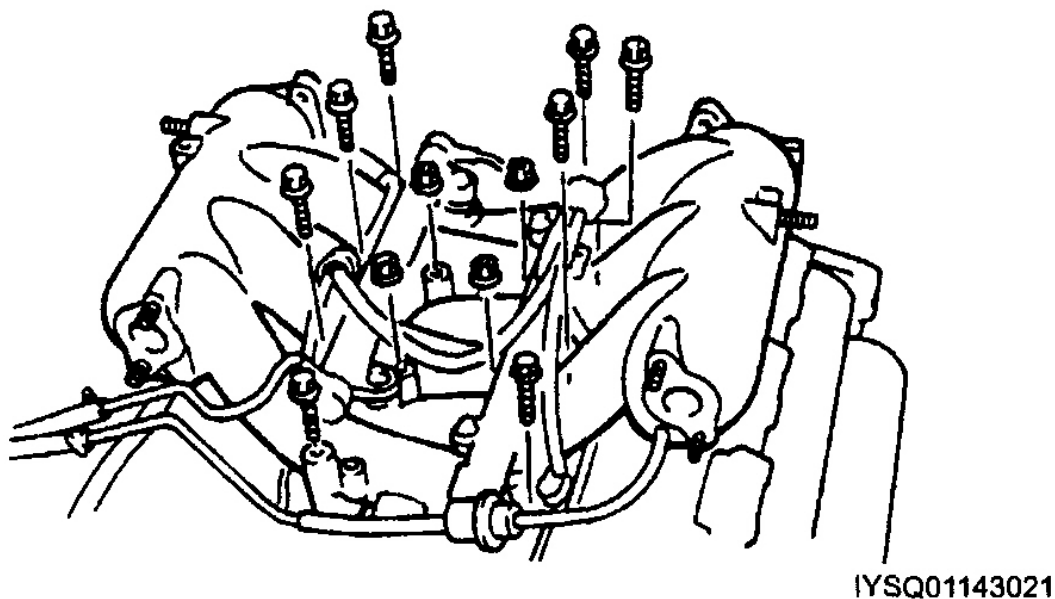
Installing Intake Manifold And Bolts And Nuts
